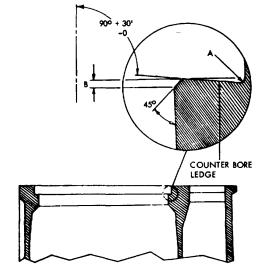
Cylinder liner counterbore cross-section. (3) Cylinder liner counterbore.
